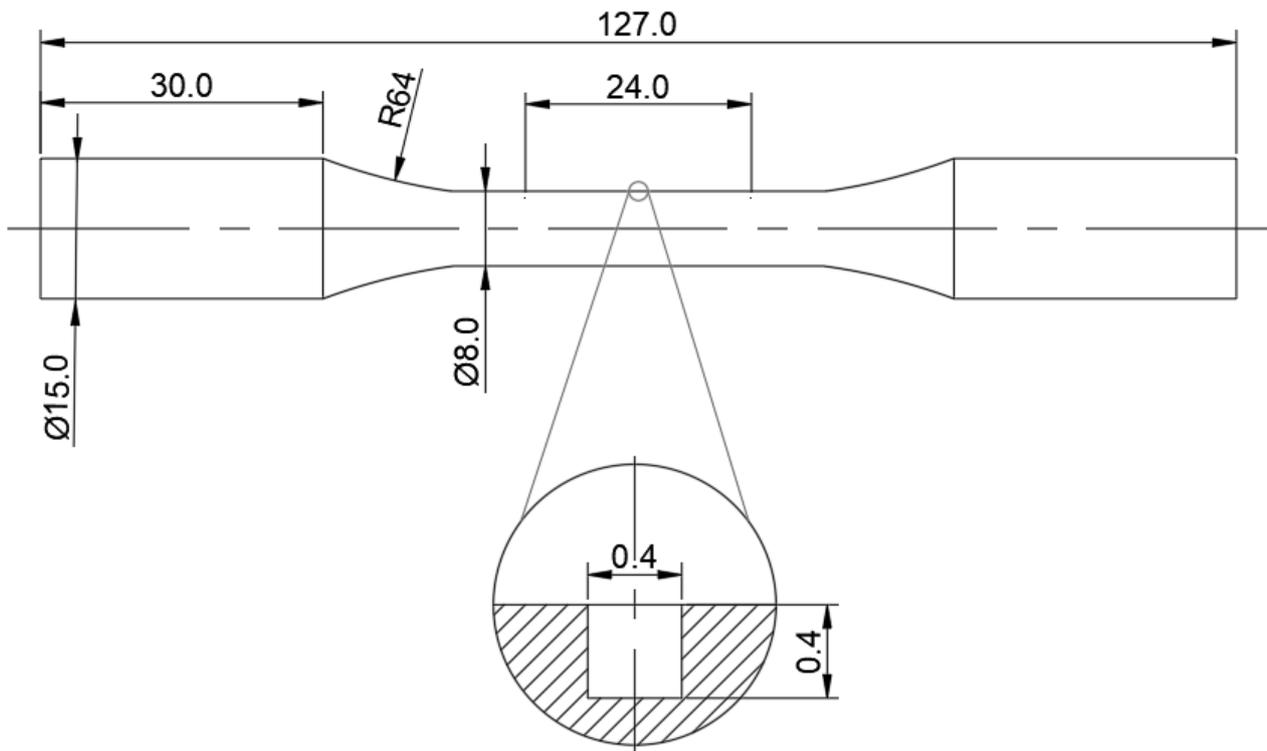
Specimen used in the fatigue tests (dimensions in mm)
